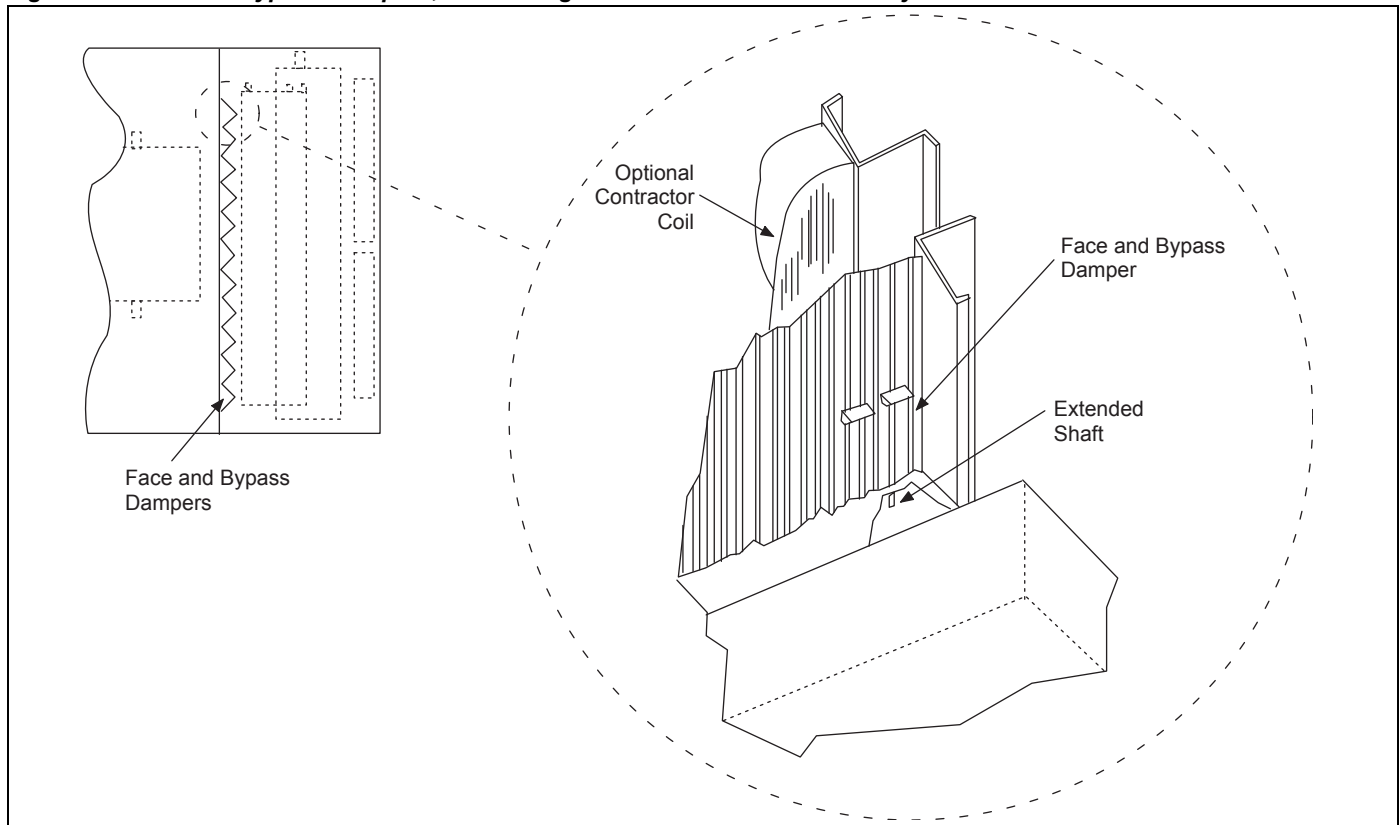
Face and Bypass Dampers, Staggered Arrangement—RAH 047C–077C Only
